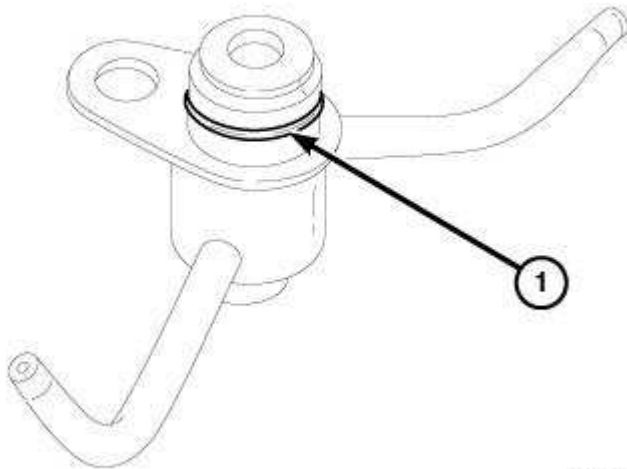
Piston Oil Cooler Jet O-Ring Seal
